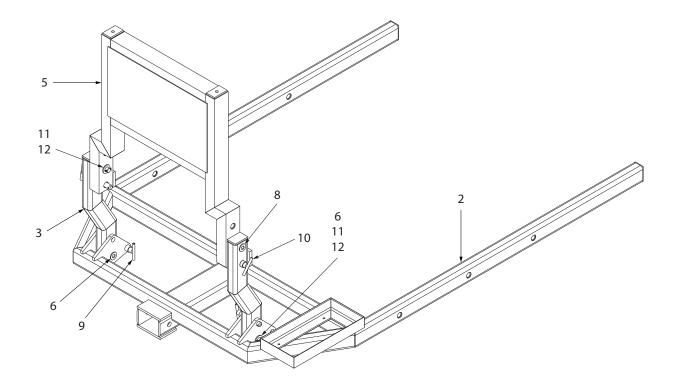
AGSE-E23707-S02 FWD Bumper Assembly
